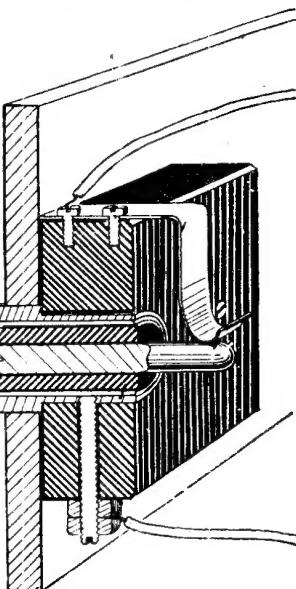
Part section of a home-made jack is shown, and the method of making contact with spring blade and plug may be seen
